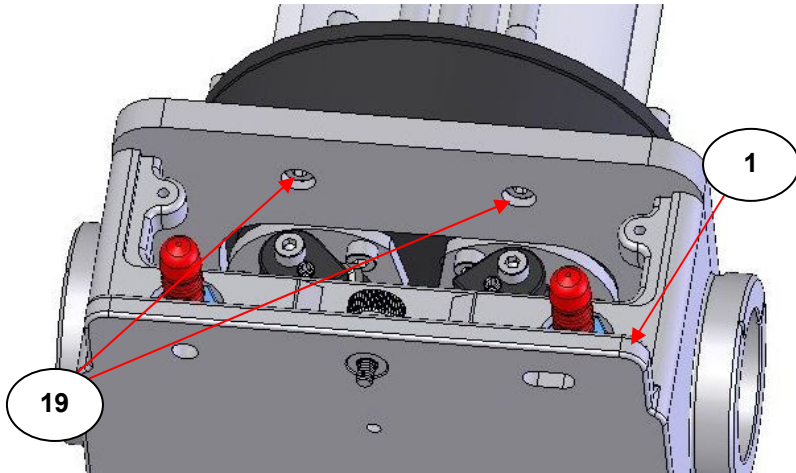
Front View of Tornado™ T5 Gas Cell Showing Fixing Screws (19) to the Optical Unit (1) - Front Cover Plate (4) Removed
